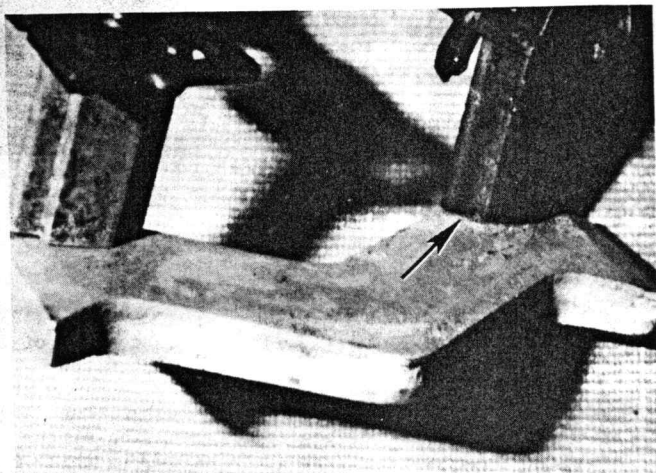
ALUMINUM BUSBAR LINK ASSEMBLY
